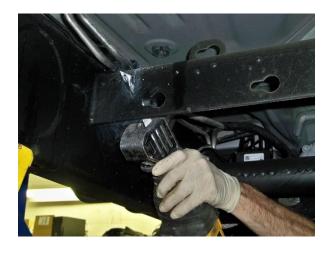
Using a torque wrench, tighten the top Flange nuts to 20 ft. lbs. using a "star" pattern.
